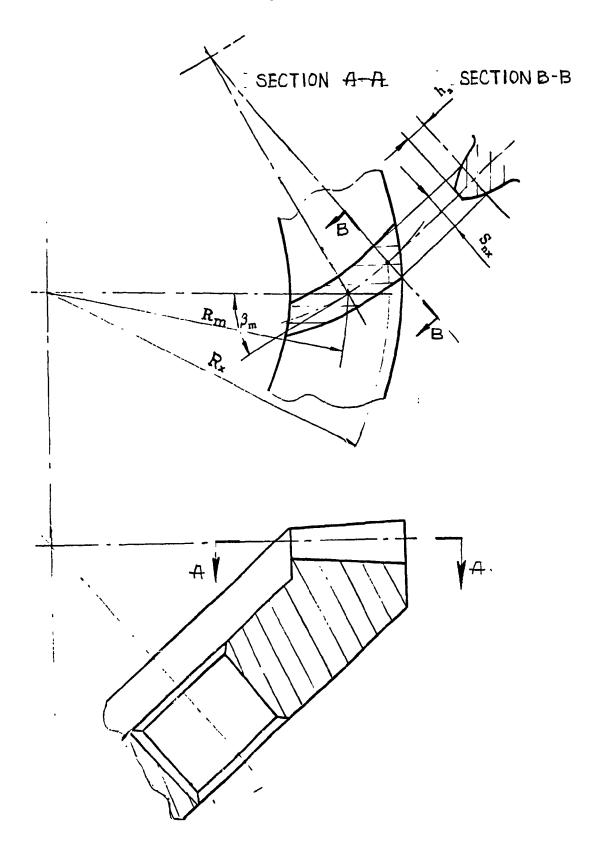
The Measurement Dimensions of Spiral Bevel Gear
